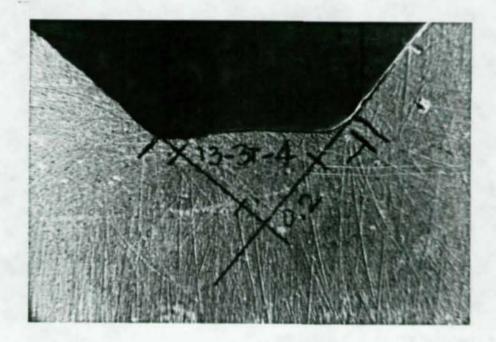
Photograph of Weld Mold; Specimen Number 11-4-T-0, Weld 1T, Cut Section Number 4
